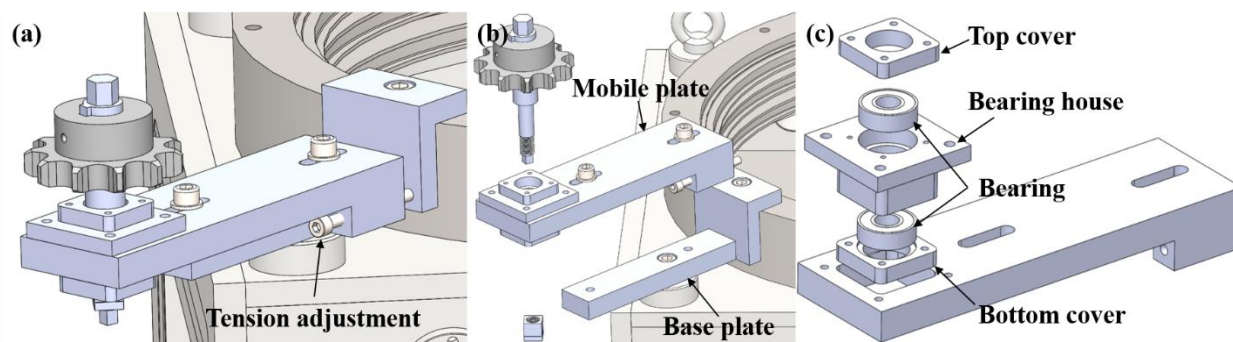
(a) 3D model of the bearing housing with the 11 teeth sprocket gear. Two M8 screws on the mobile plate allow for adjustment of the tension of the chain. (b) Exploded view of the bearing housing attachment which is composed of a base plate, a mobile plate assembly, and the sprocket gear. (c) Exploded view of the bearing house. It accommodates two bearings which constrain the motion of the gear shaft.
